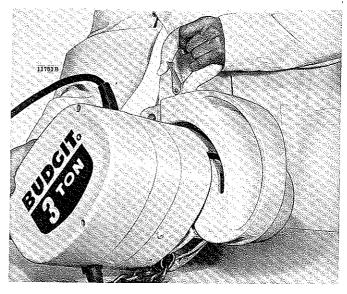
Removing 3 Ton Hanger Bracket from Hoist Frame
